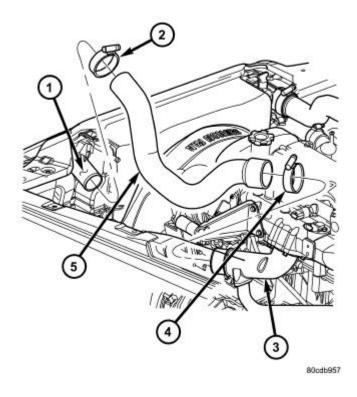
Charge Air Cooler, Hose Clamp, Intake Manifold Inlet, Hose Clamp & Charge Air Cooler Outlet Hose
